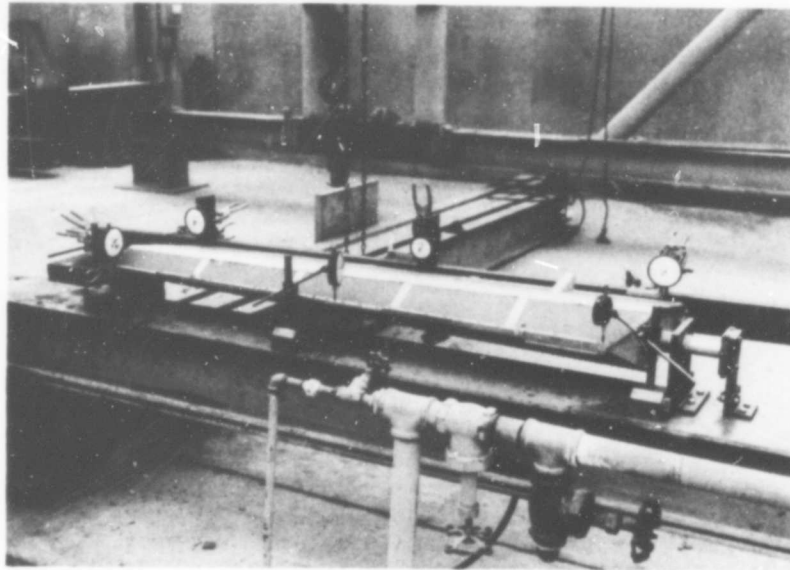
View Showing Rudder Accommodating Jig and Deflection Measurement Setup. Note Torque Tube Tie In.
